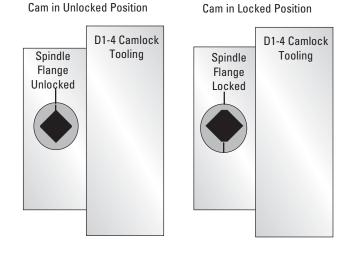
D1-4 Lathe Chuck in Locked & Unlocked Position
